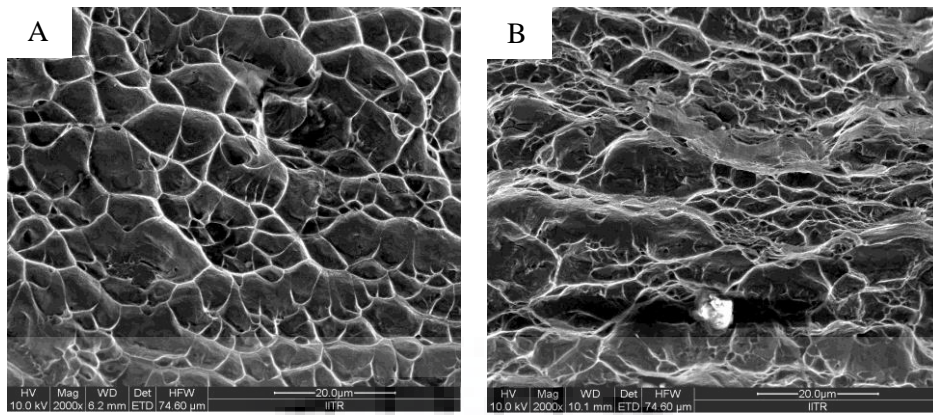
Fractographs for (a) WQ880 (b) WQ900 Samples
